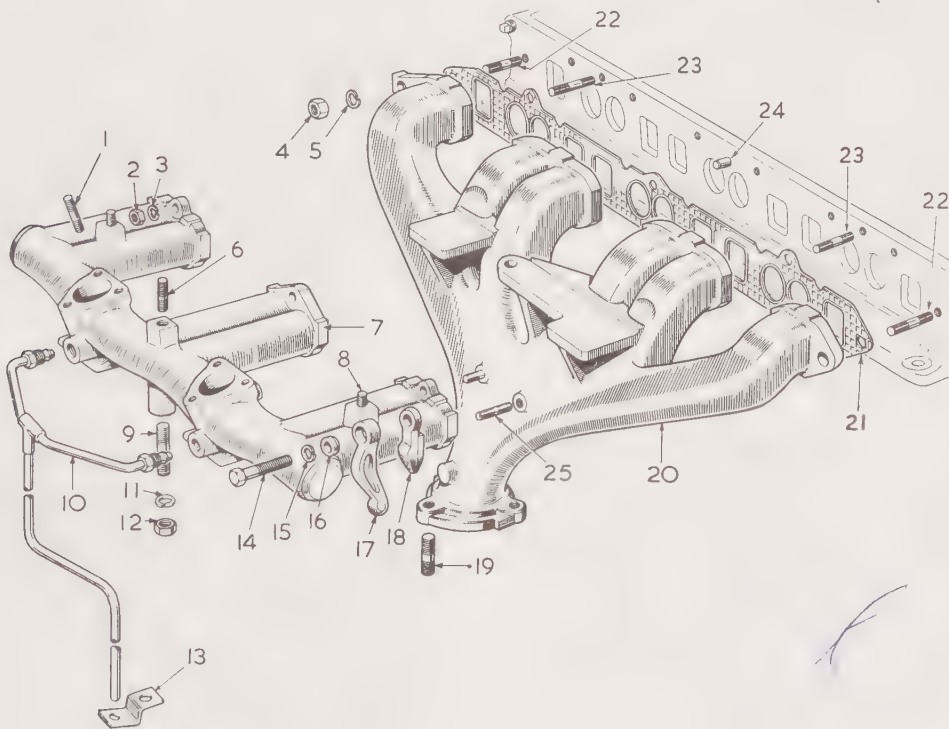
15 Manifolding of 1600 cc 6-cylinder engine (Solex carburettors).
